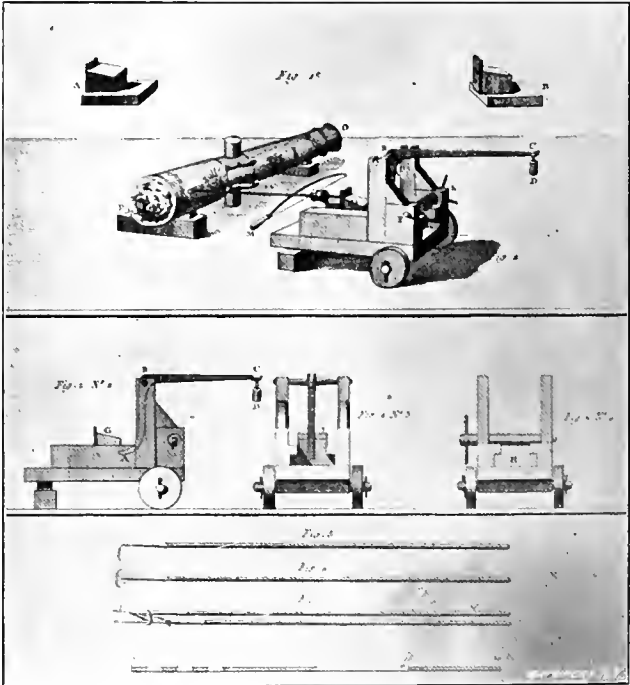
Plate III. A Portable Drilling and Boring Machine with Automatic Feed—Early French Type
